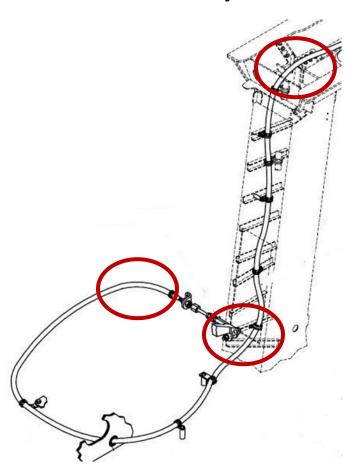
Locations of Reported Throttle Cable Assembly Failures
